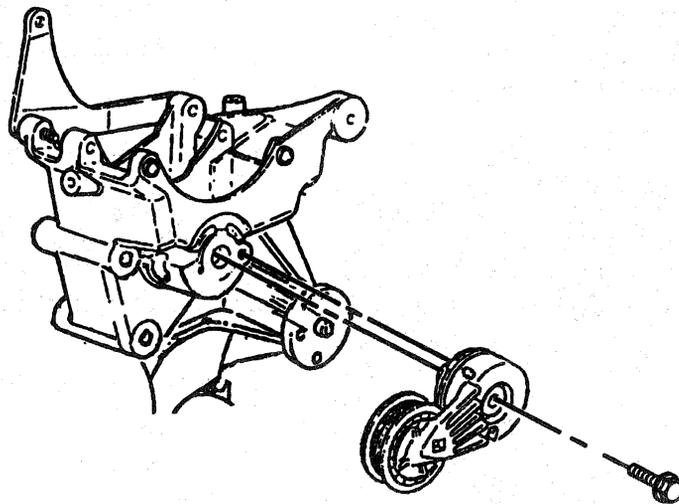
Belt Tensioner Assembly (4.3L, 5.0L, and 5.7L Engines)
